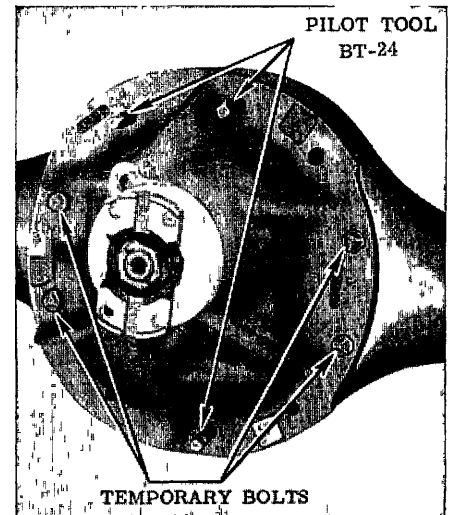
Installing machined carrier into axle housing on 1949-52 V8 models
